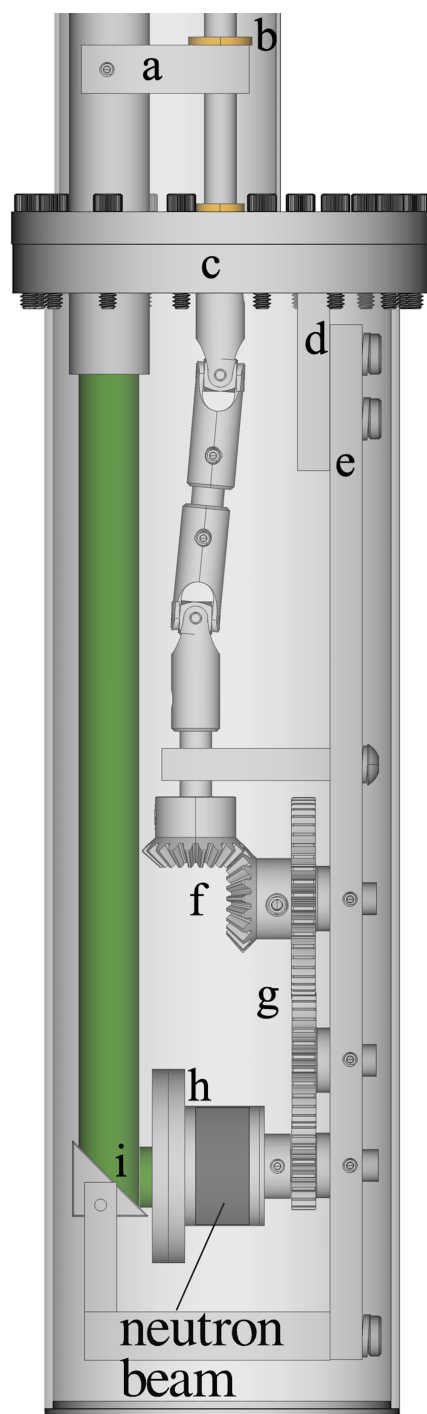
Inside view within lower cover of the optical and mechanical transmission components of photochemistry sample stick. a) linear guide b) Rulon J bearing c) lower flange d) support bracket e) support rib f) miter gears g) spur gears h) sample container i) laser beam
